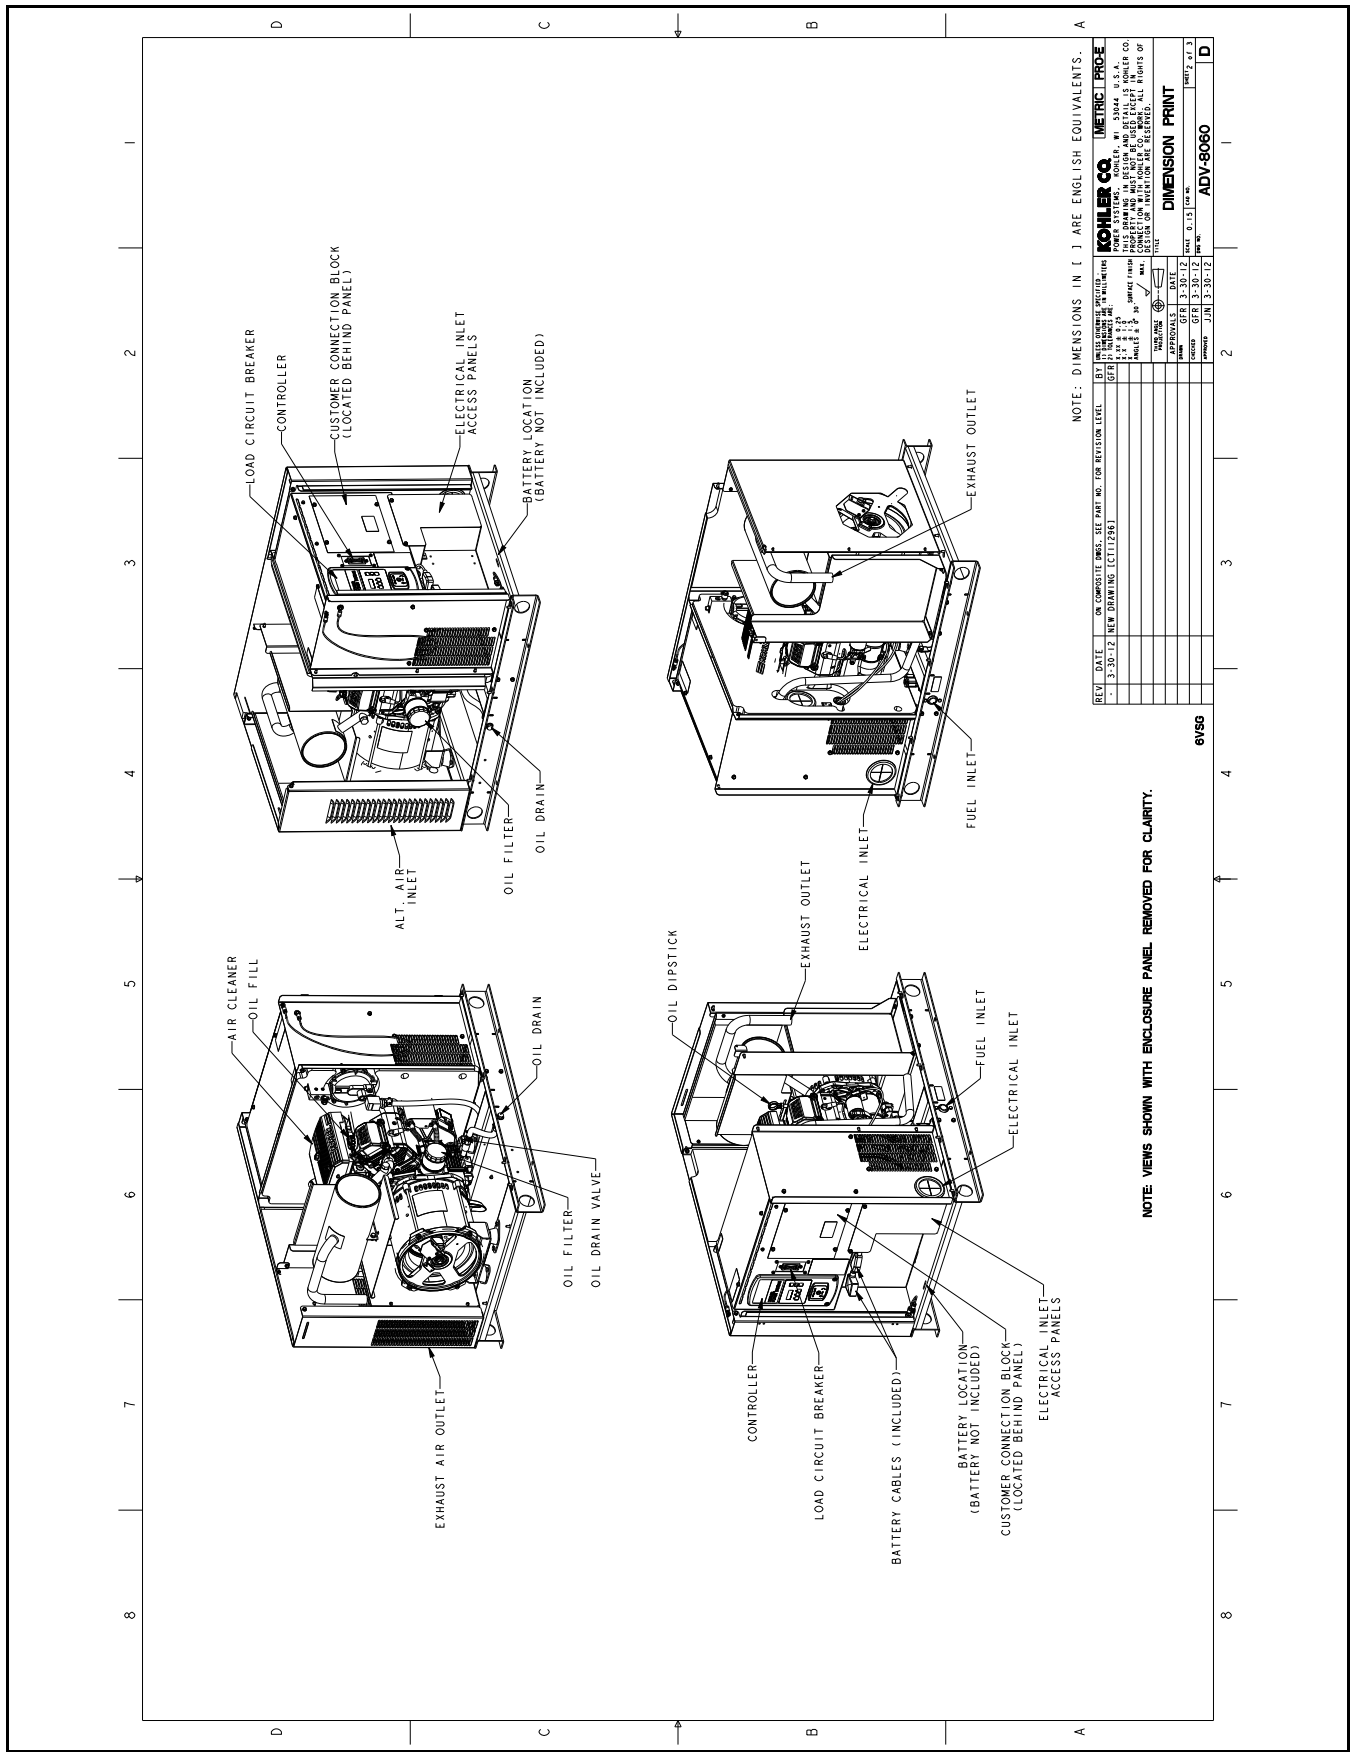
Dimension Drawing ADV-8060, Sheet 2
